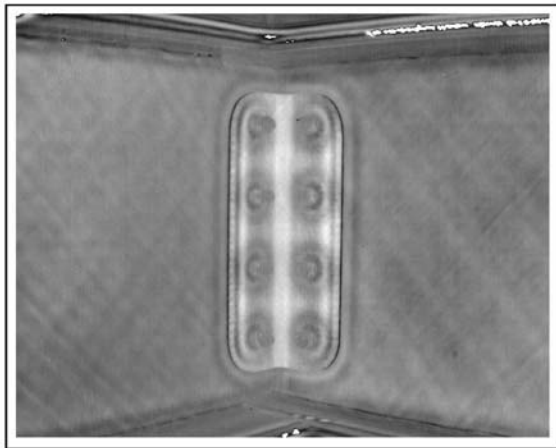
Thermal inspection results for cruciform 1, rivet 3.
